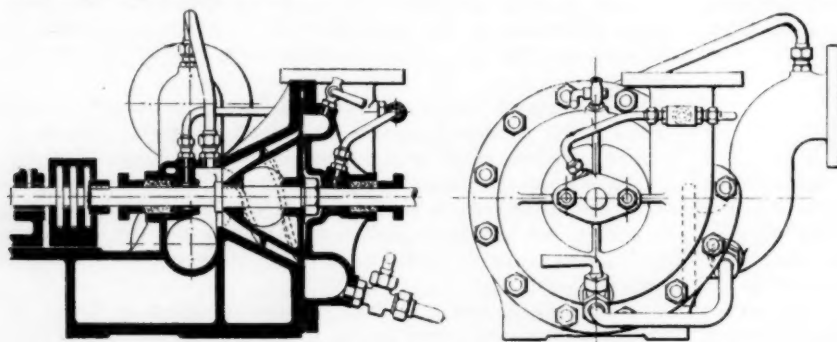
SECTION AND END VIEW OF MUMFORD CONICAL ROTARY PUMP
